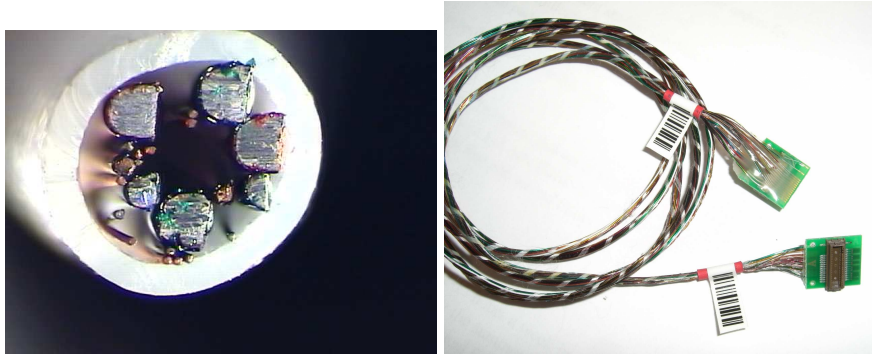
(a) Section through a disk T0 cable and (b) detail of a barrel T0 cable.
